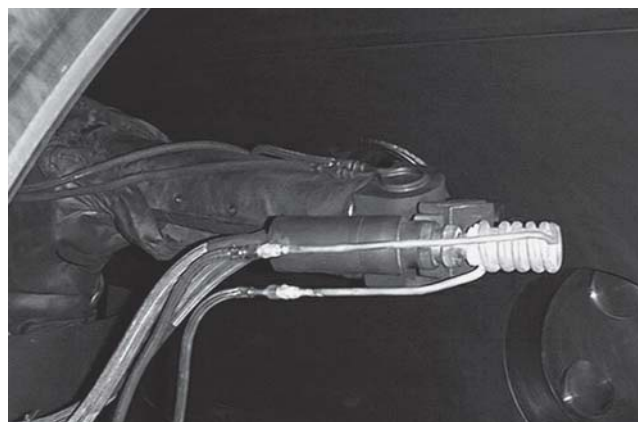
Plasma gun fixed on the robot arm in the vacuum chamber (before the nozzle shortening)
